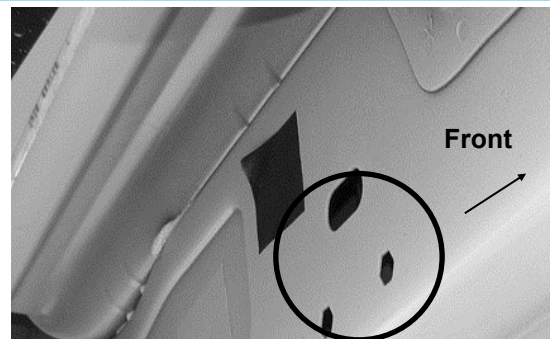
Attach Driver Front Support Bracket to Drive Front Mounting Bracket
